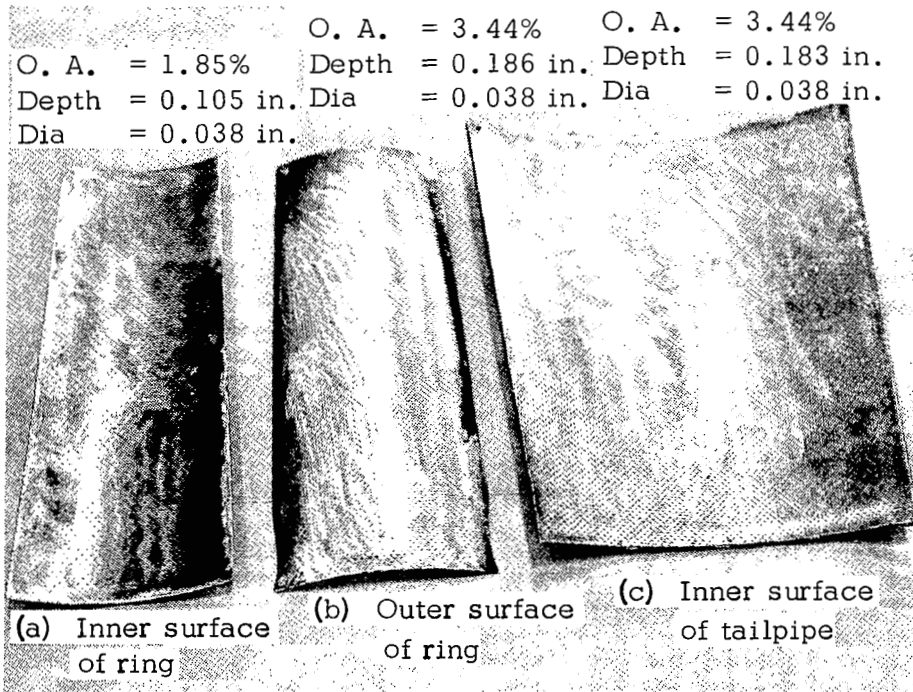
Furnace-brazed, stainless steel, acoustic panels
